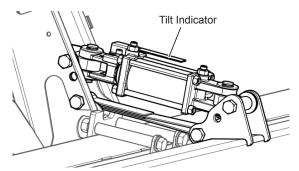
Hydraulic Tilt Cylinder & Indicator
